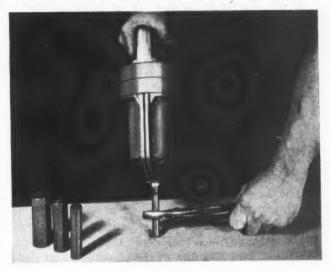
Using the "Heat Gun" for Heating a Pin prior to Performing an Upsetting Operation
